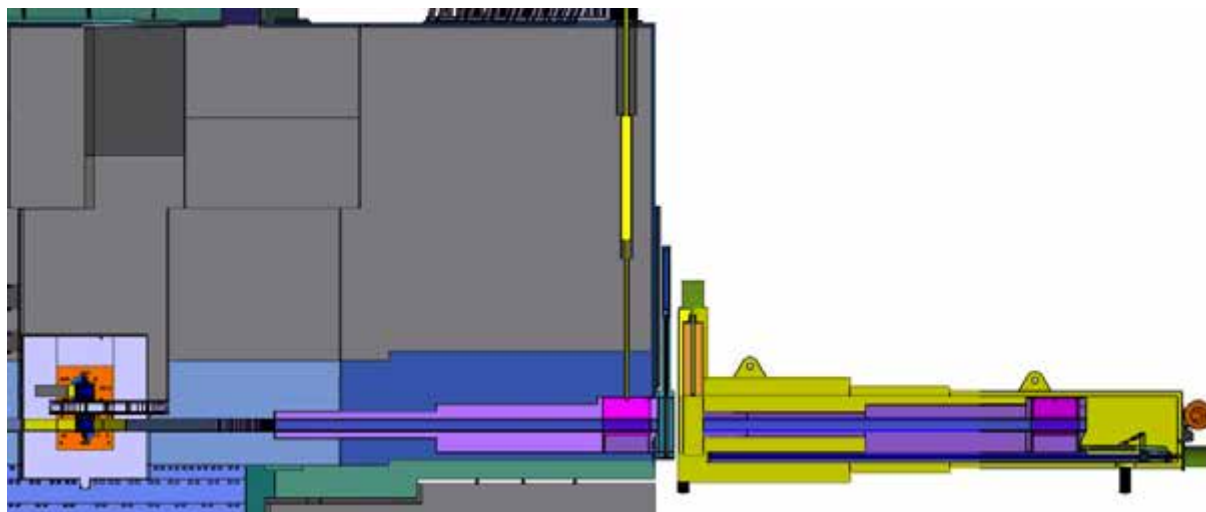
A cross section view of the neutron beam port with shielded handling cask in place.
